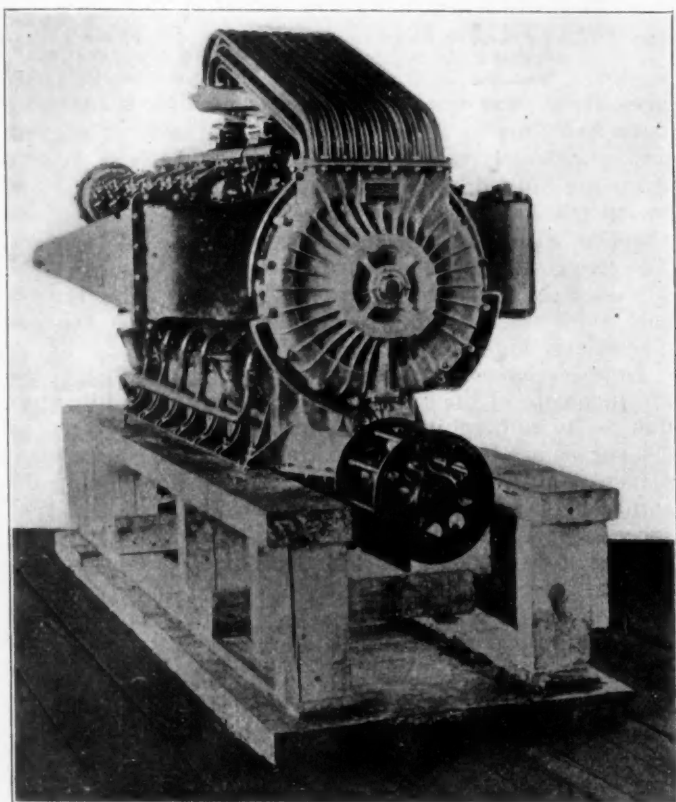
THE MOSS SUPERCHARGER MOUNTED ON A 12-CYLINDER LIBERTY ENGINE
